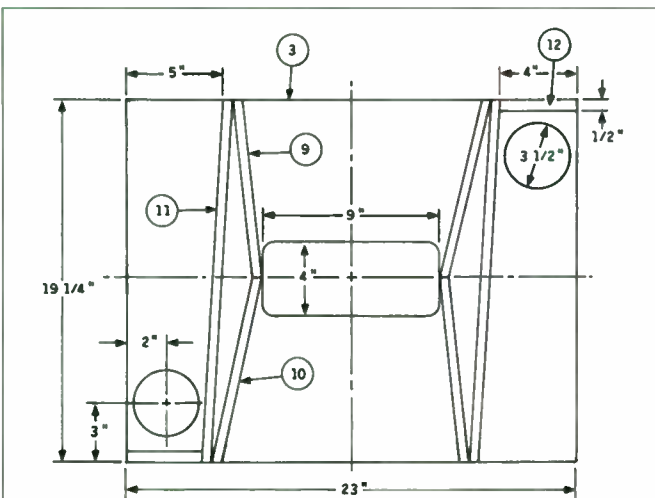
Baffle layout and dimension; throat choke not shown.
